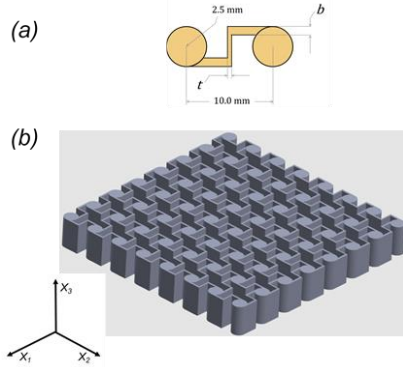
Designed 2D metamaterial with granular motif. (a) Building-block geometry showing the duoskelion mechanism. (b) Perspective view of the specimen with square mechano-morphology.
